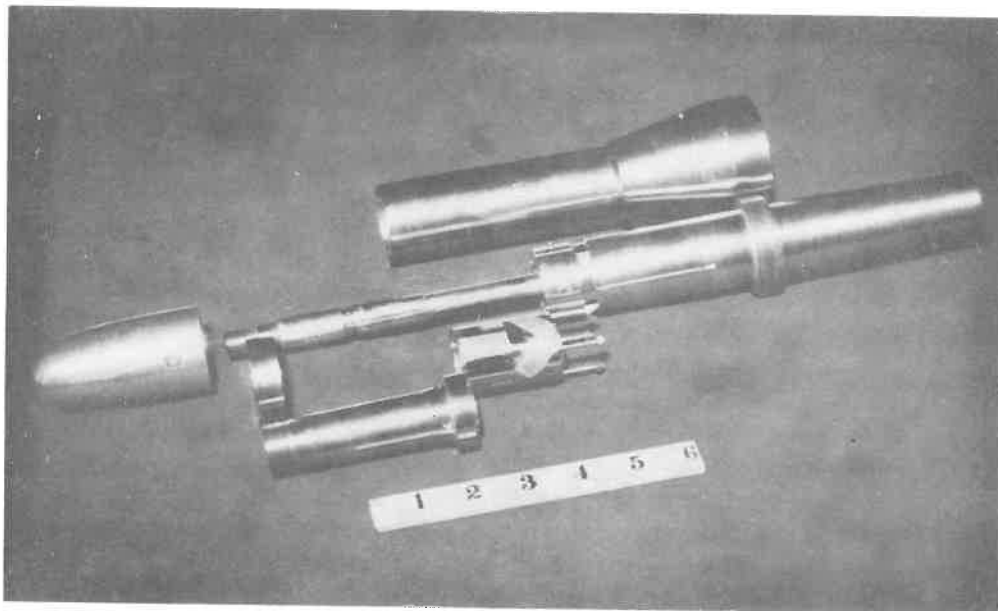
VIEW OF DYNAMOMETER BEFORE ASSEMBLY.
